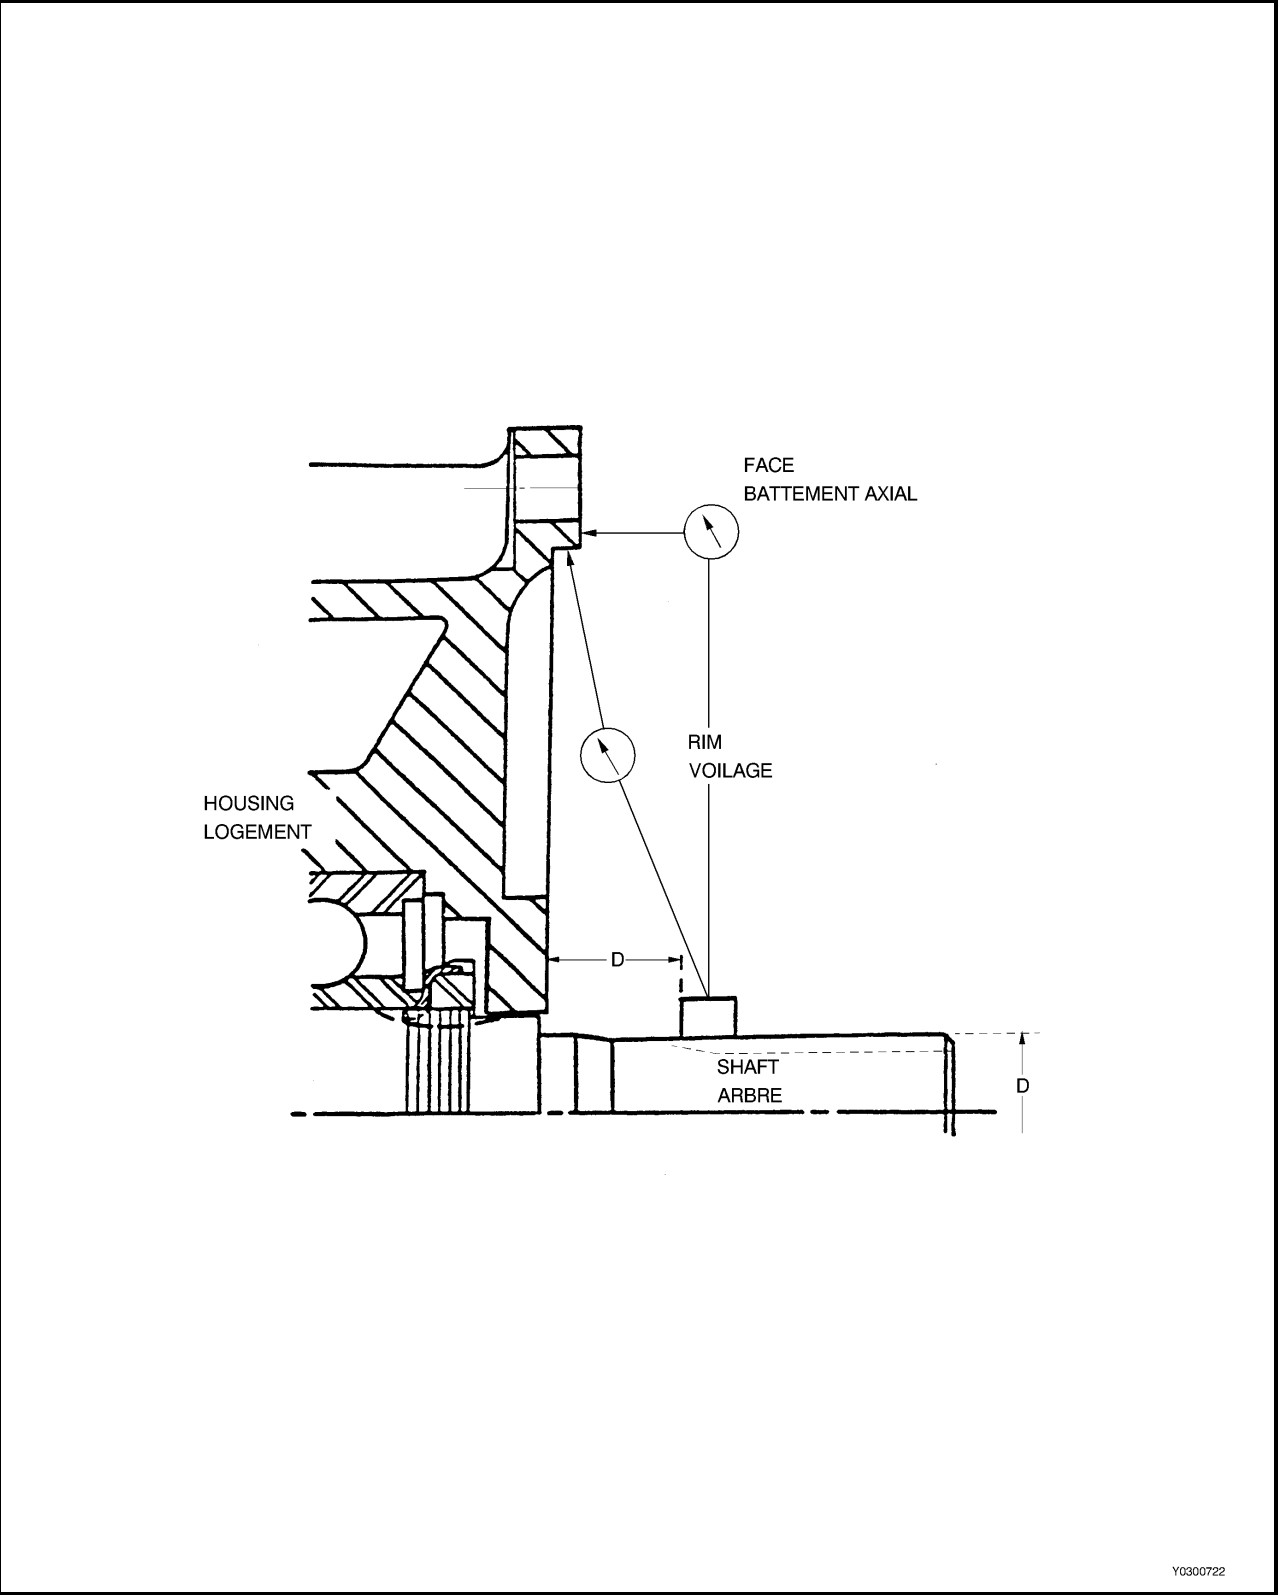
Measurement Location for Determining Face and Rim Runouts of P Flange-Mounted Motor
